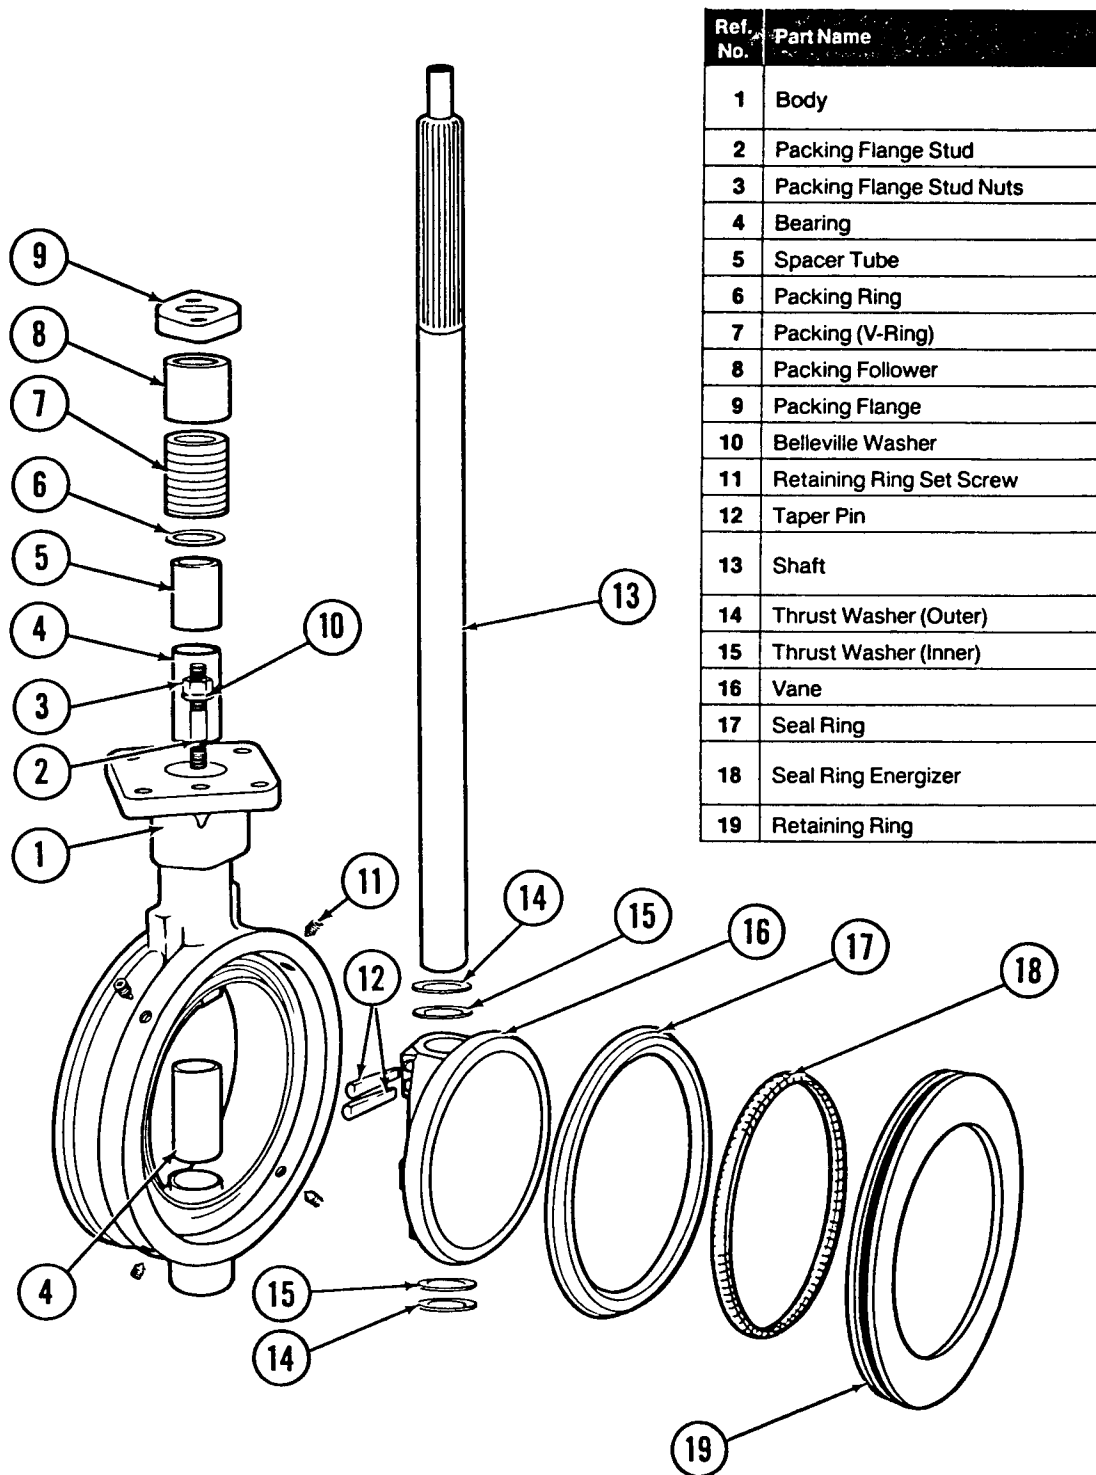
WAFER TYPE BUTTERFLY VALVE
